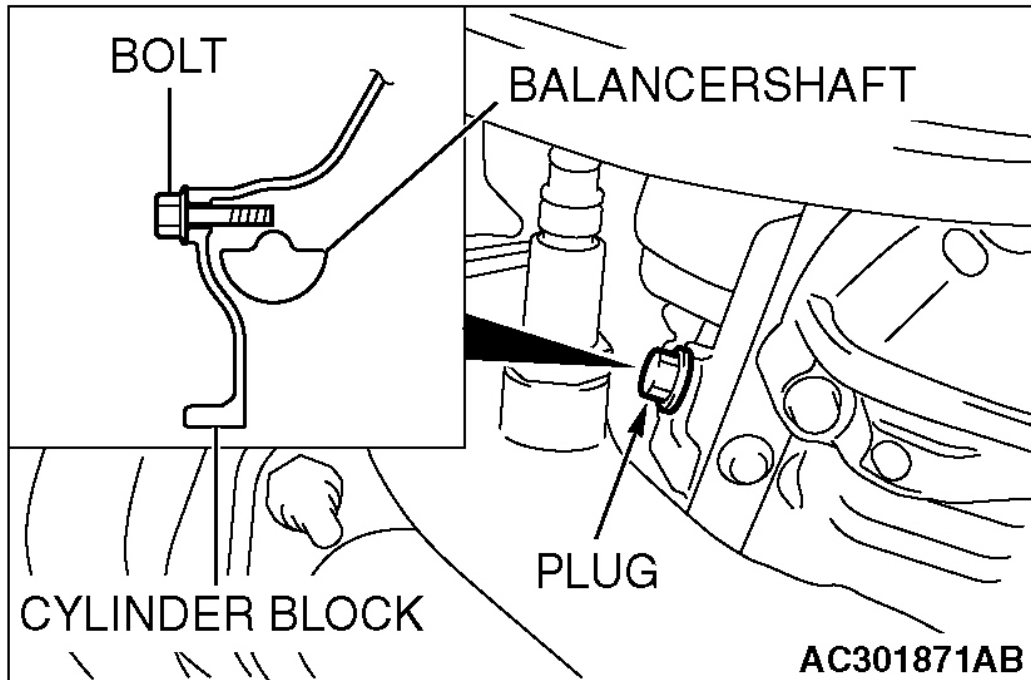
Tightening Cylinder Block Plug To Specified Torque
